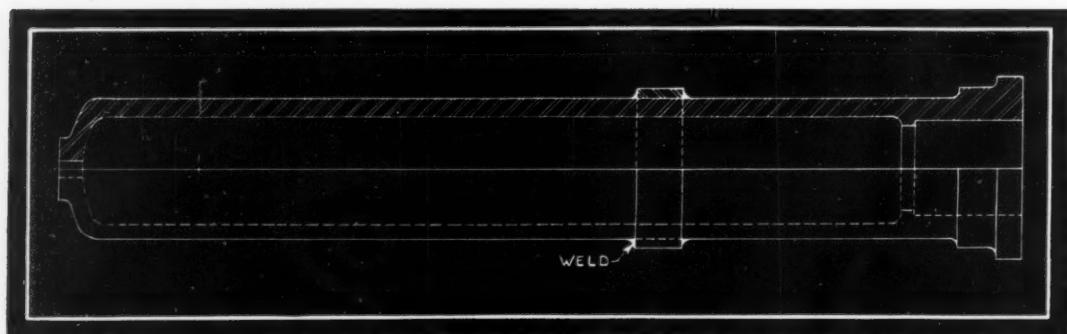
Seating ring on casting replaced by welded, rolled ring
